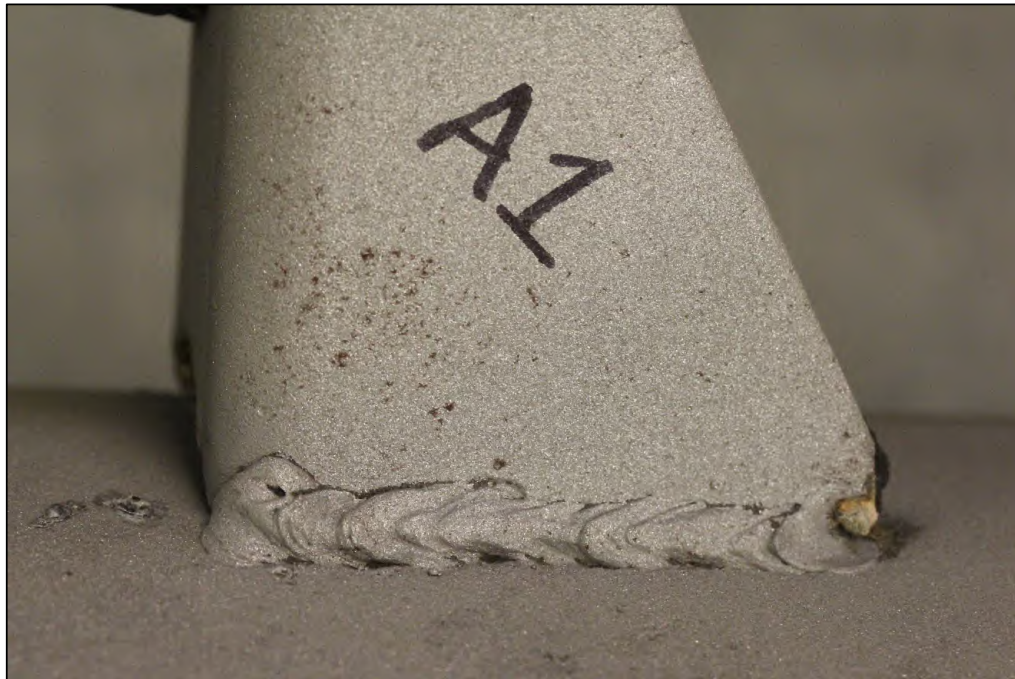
Image of the Lug A1 exterior weld which exhibited substantial fusion except for some undercut, arc strikes, and overlap.
